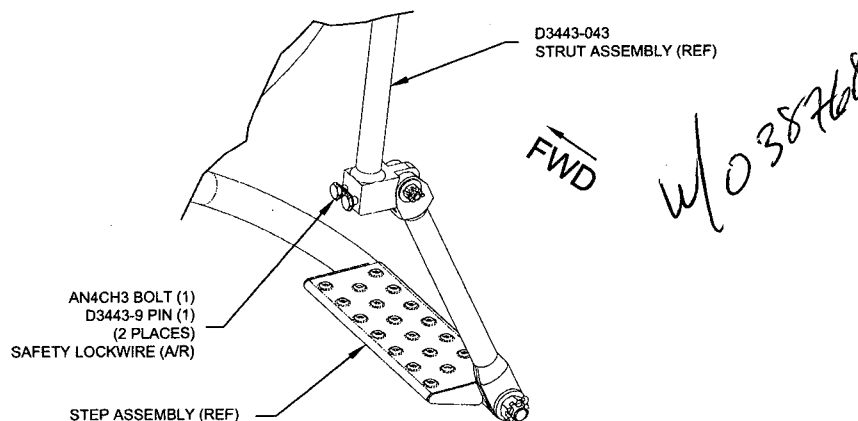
Detail Safety Wiring, D412-630-032 RH, Pilot/Co-Pilot Folding-Step Installation (Shown)
